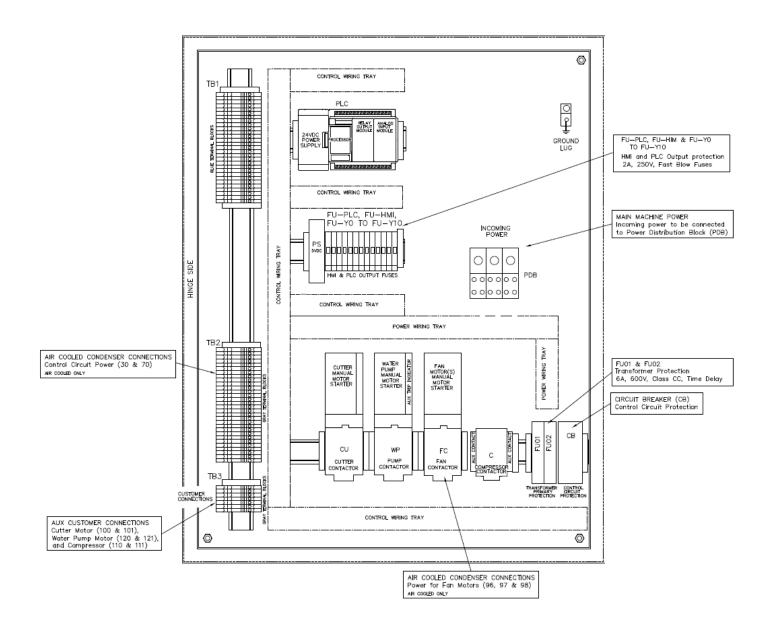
Panel Layout, 60-Hz Non-CE Machines
